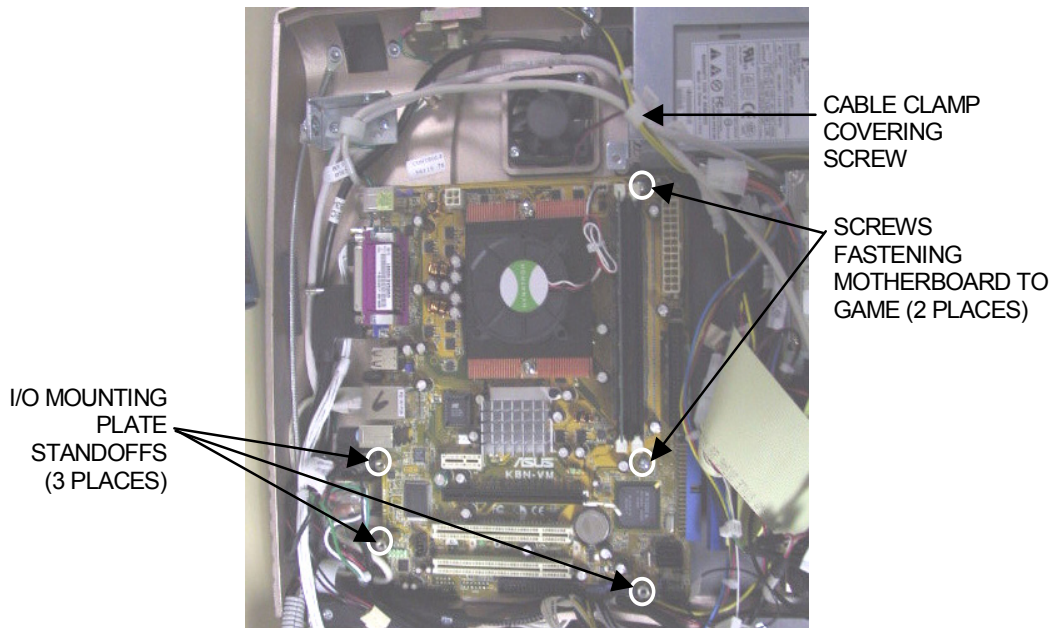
ASUS MOTHERBOARD ASSEMBLY (3 STANDOFFS & 2 SCREWS)
